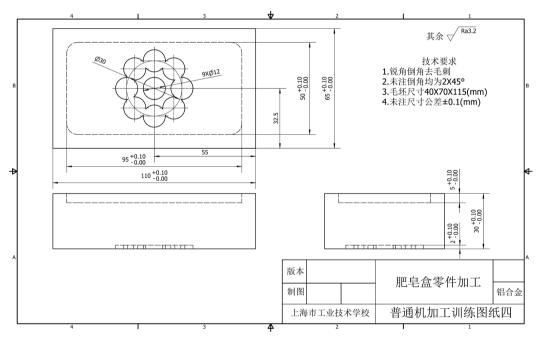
Drawing of circumference equipartition machining training project 图 4. 圆周等分加工训练项目图纸
